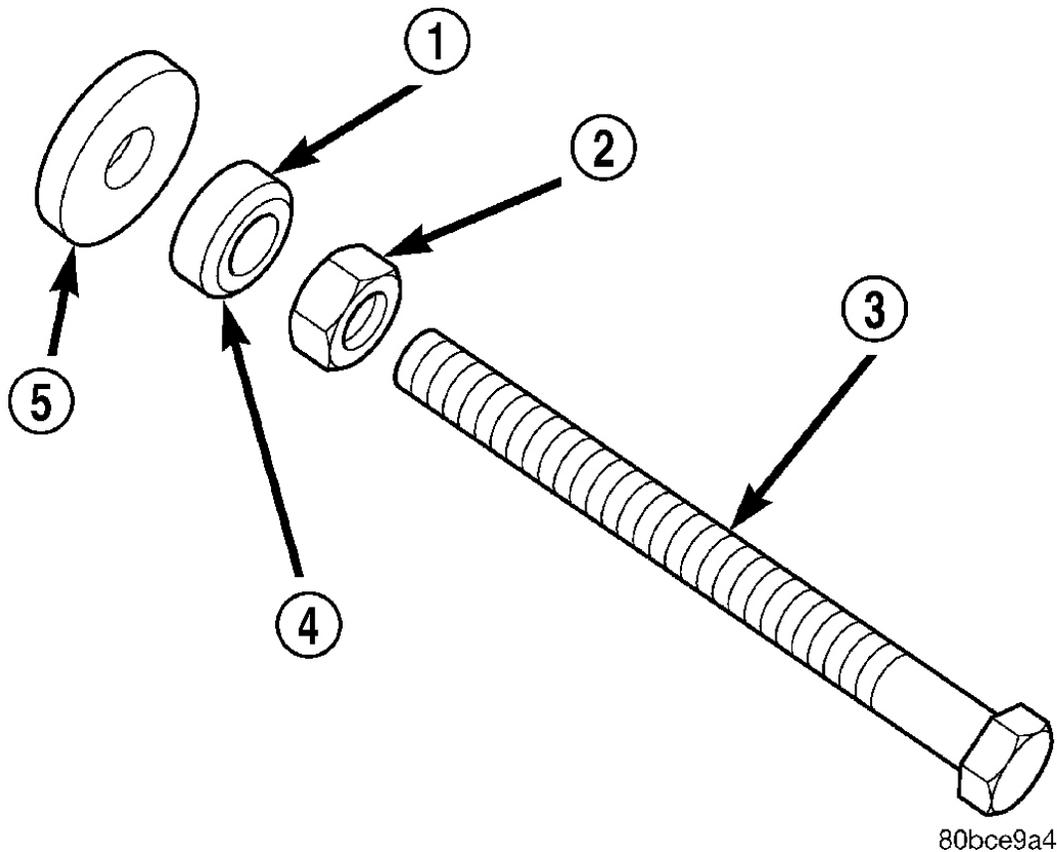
Proper Assembly Method for Special Tool 8512-A
